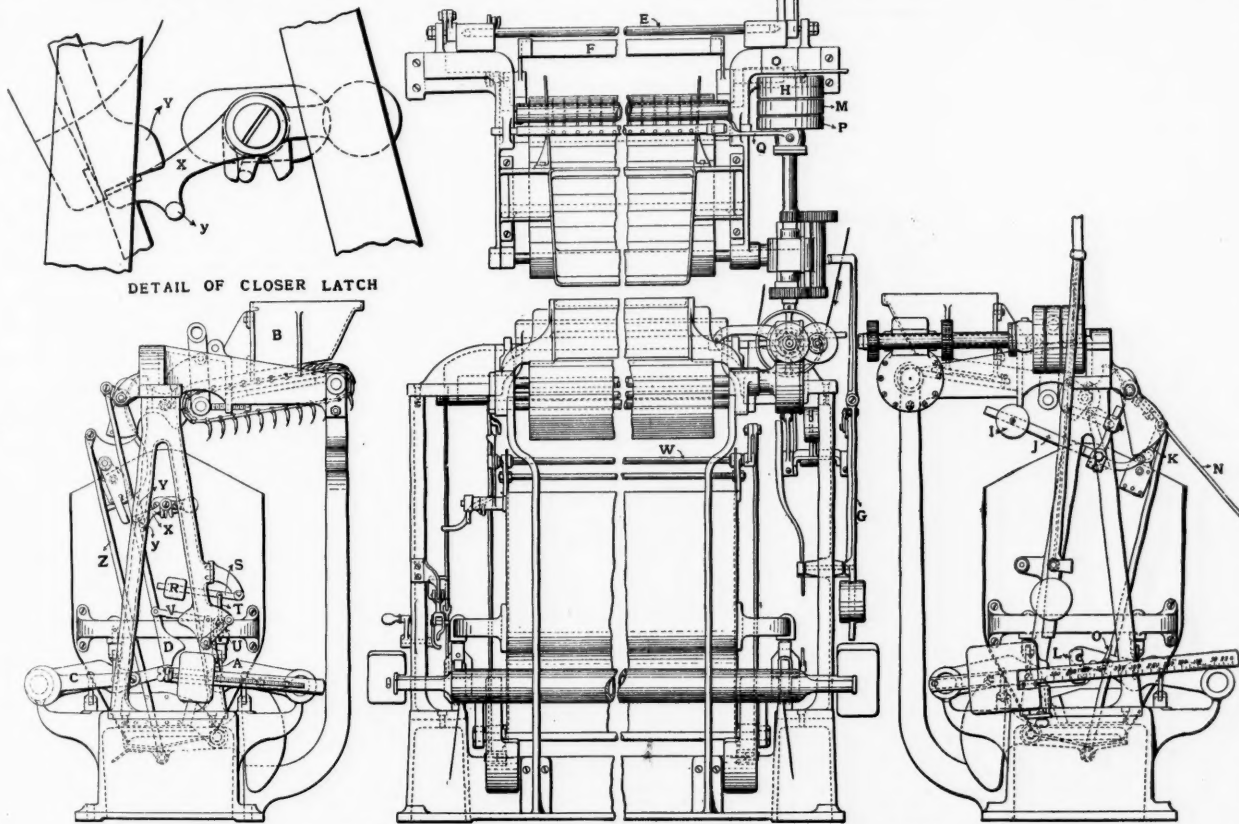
The Richards Power Feed, Automatic, Weighing Machine—Pratt & Whitney Co.
